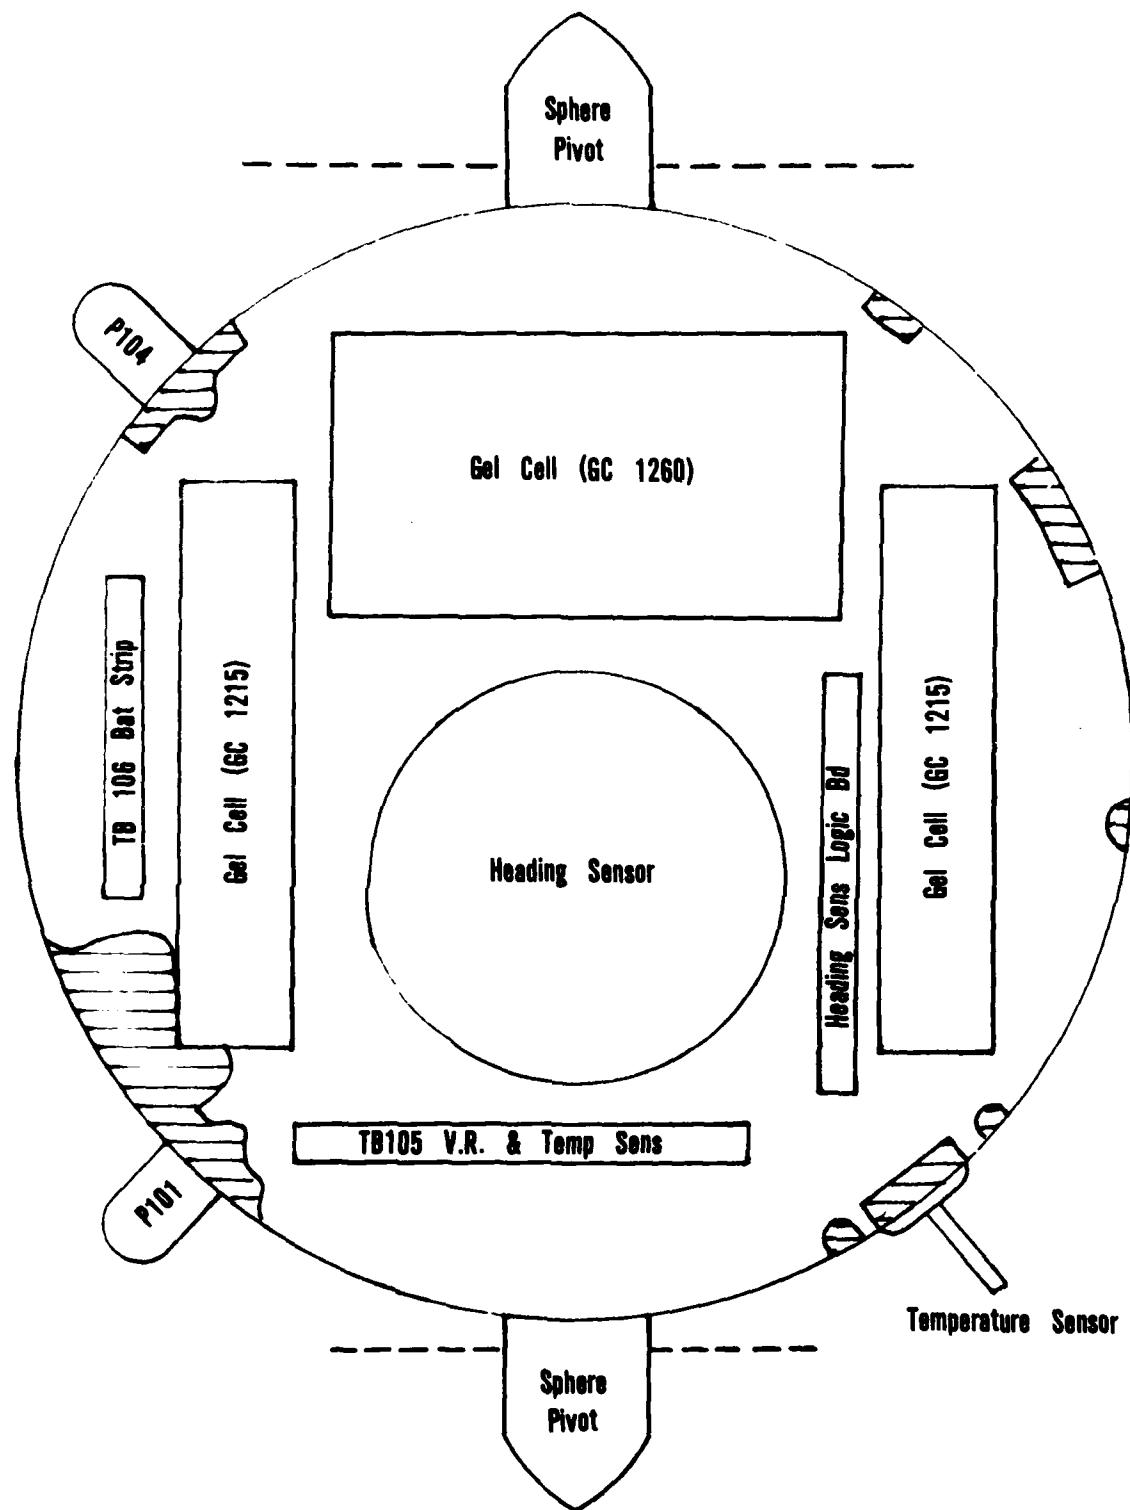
Bottom View of Chassis within Main Control Housing (upper sphere)
